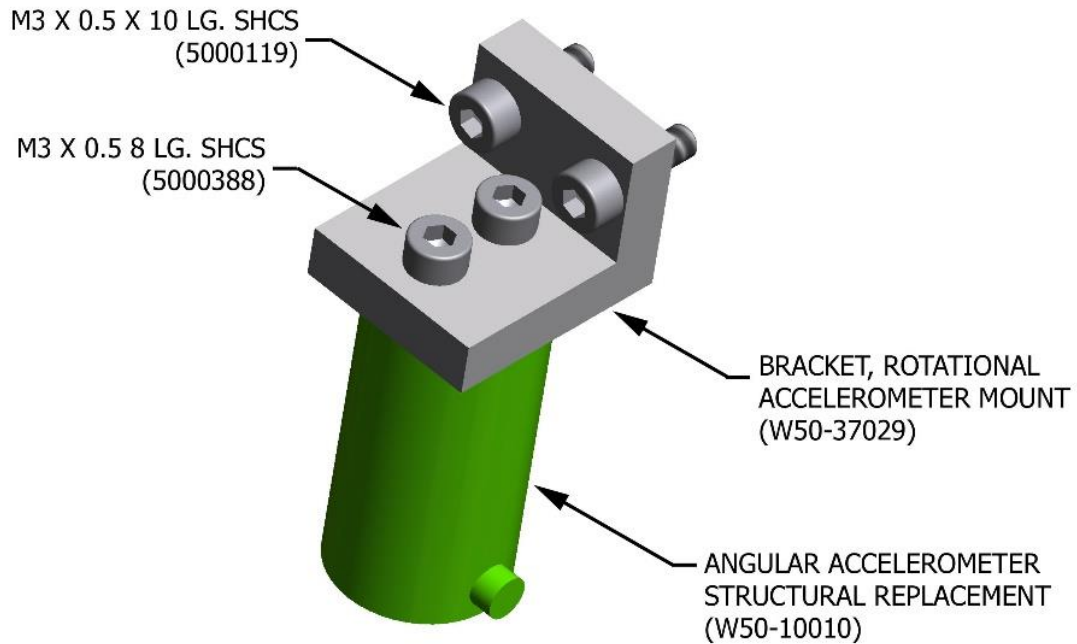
Detaching the angular accelerometer structural replacement from the rotational accelerometer mount bracket.
